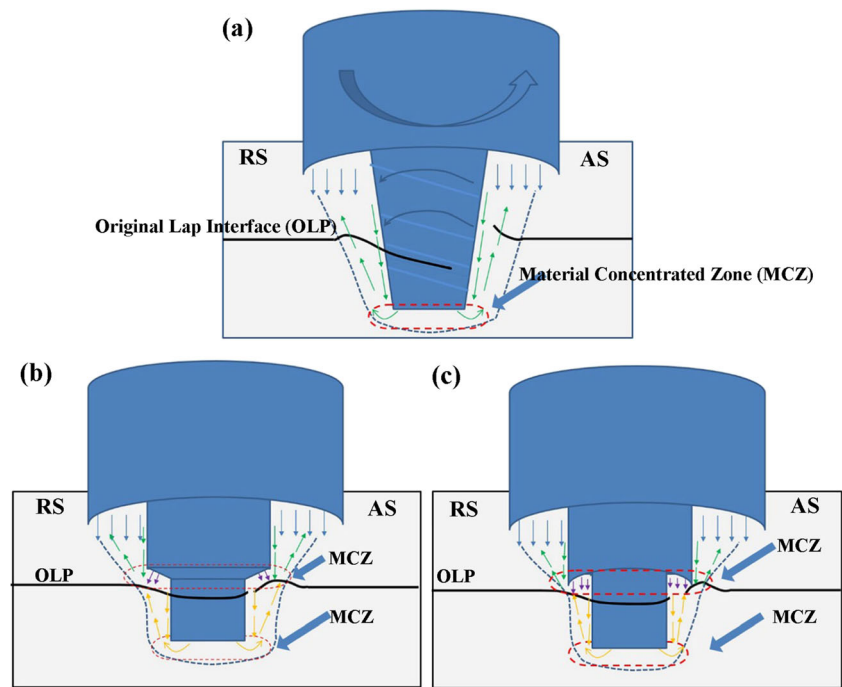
Material flow schematics of different tools: (a) tool A, (b) tool B, and (c) tool C
